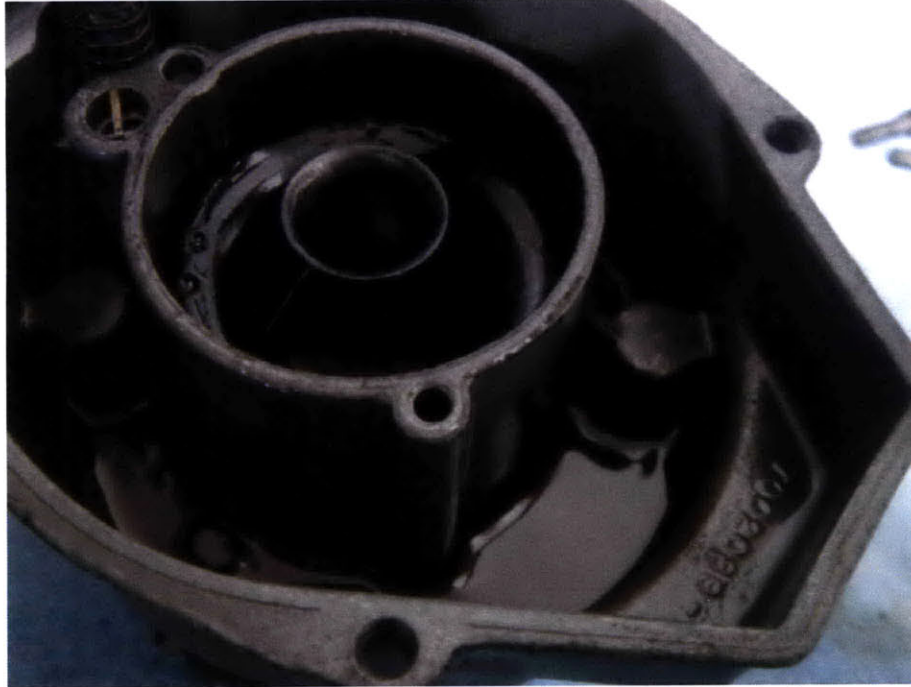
Carburetor bowl before refurbishing. Notice sediment left in the bottom after fuel was poured out.
